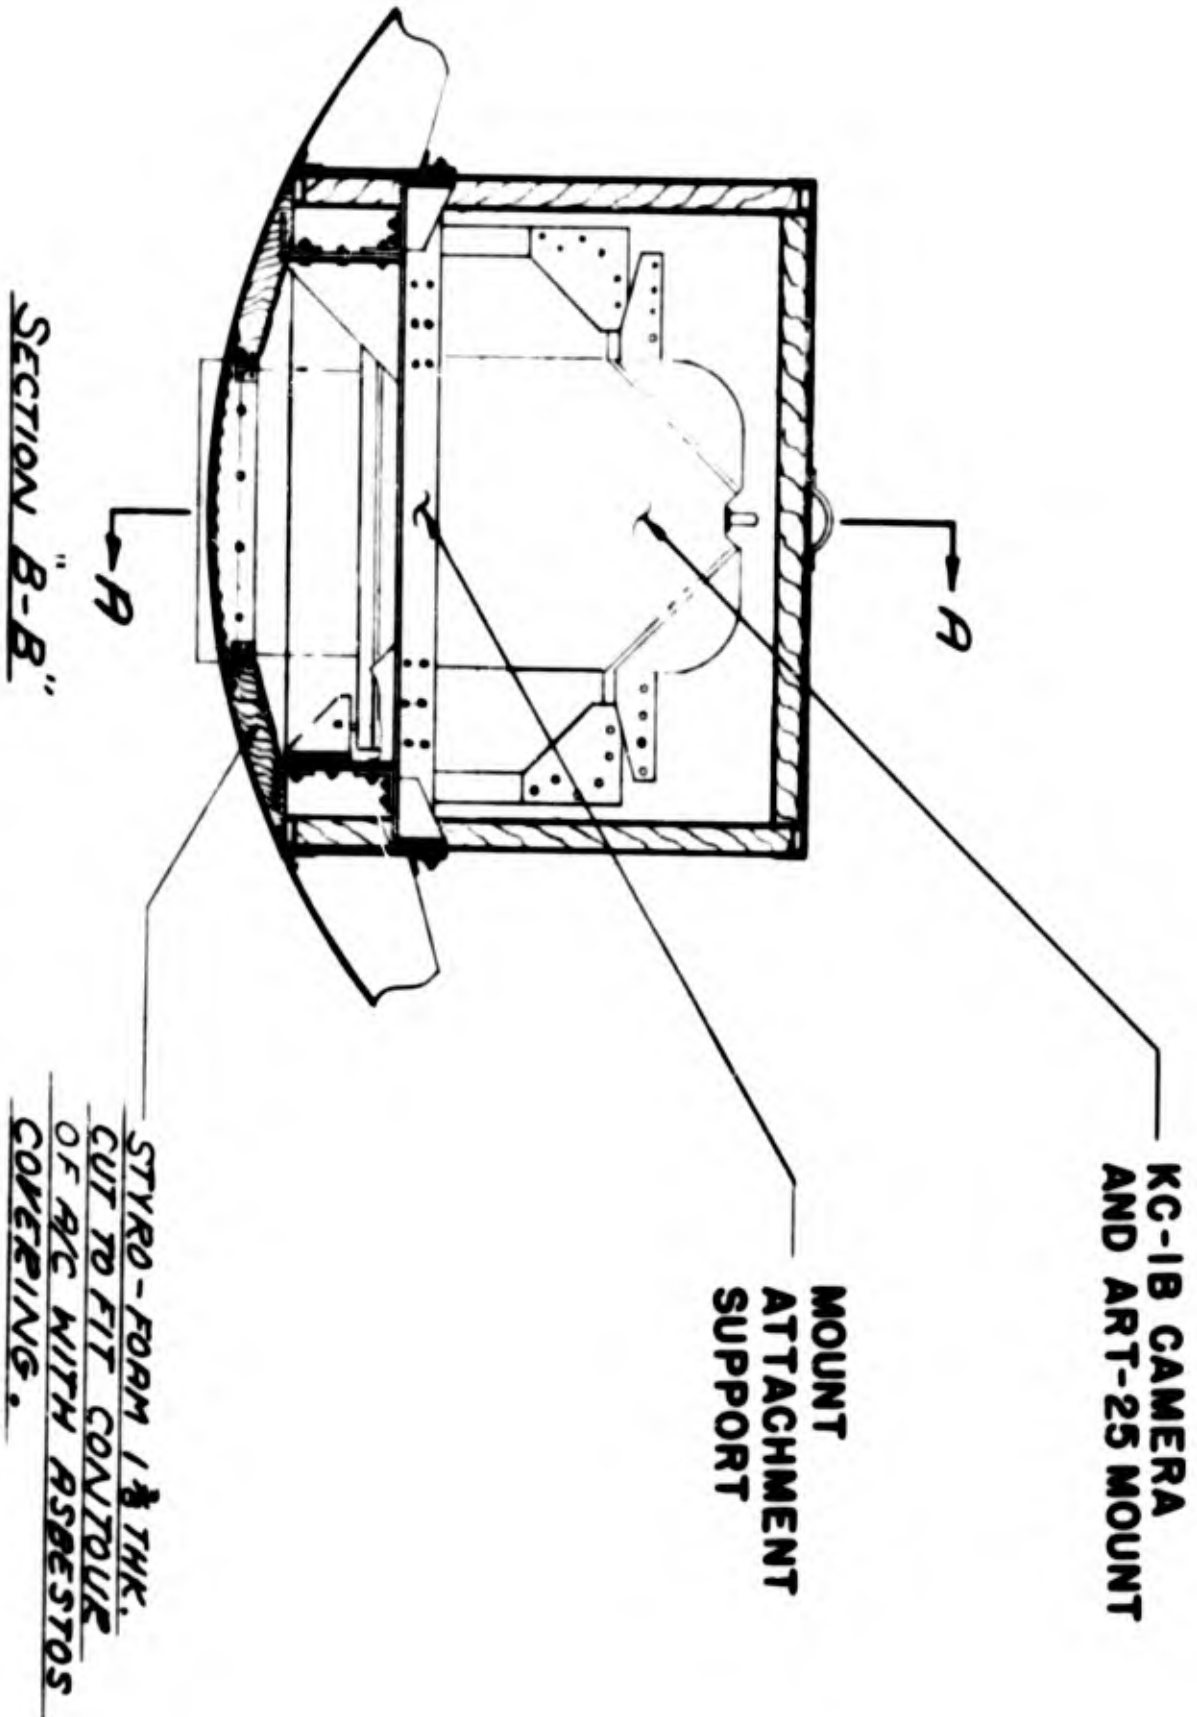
CAMERA CHAMBER CONSTRUCTION (END VIEW)
